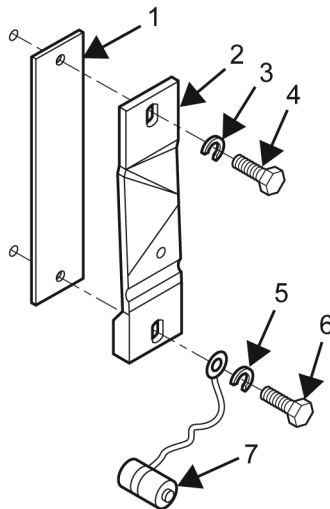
Adjusting the Weather Gasket Seal Pressure (Latch Side).
